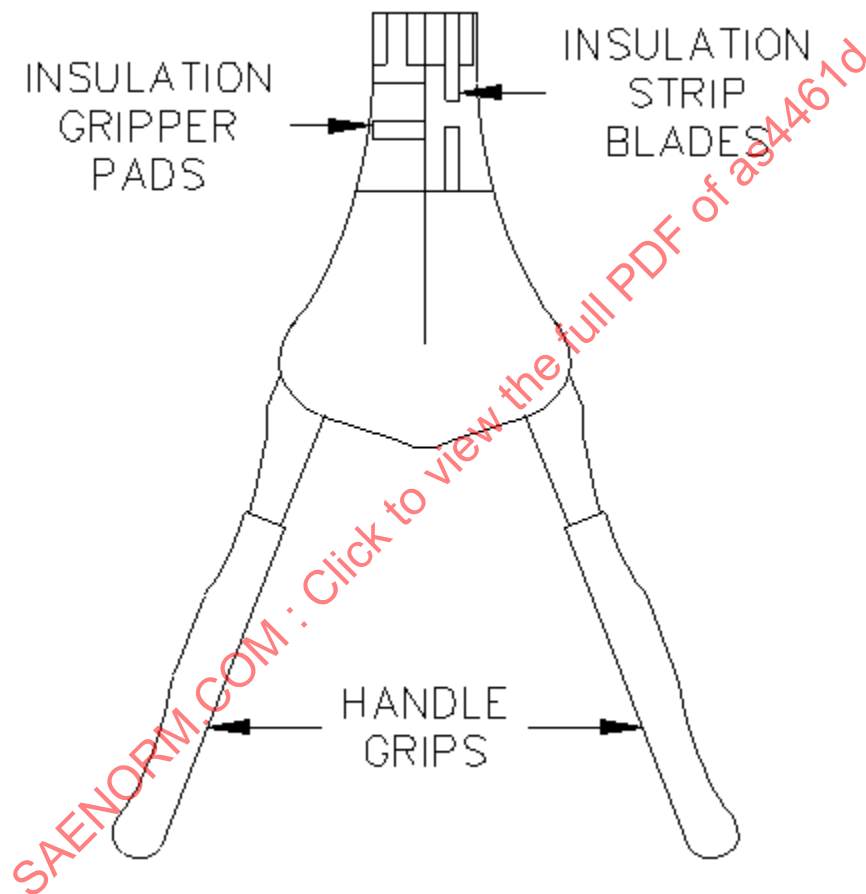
AS5768 mechanical hand wire stripper (see 4.6.2.2)
